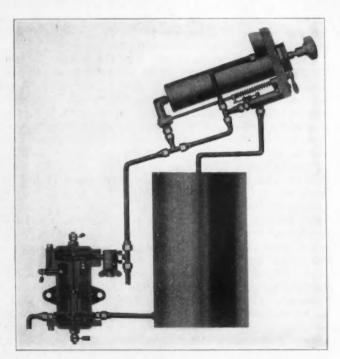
Solenoid Starting Valve with Auxiliary Air Tank
